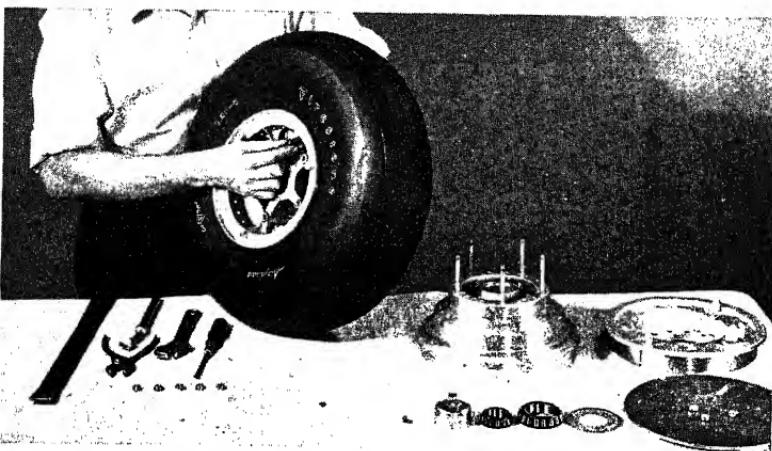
Pushing the outboard part of the wheel toward the valve ste.
